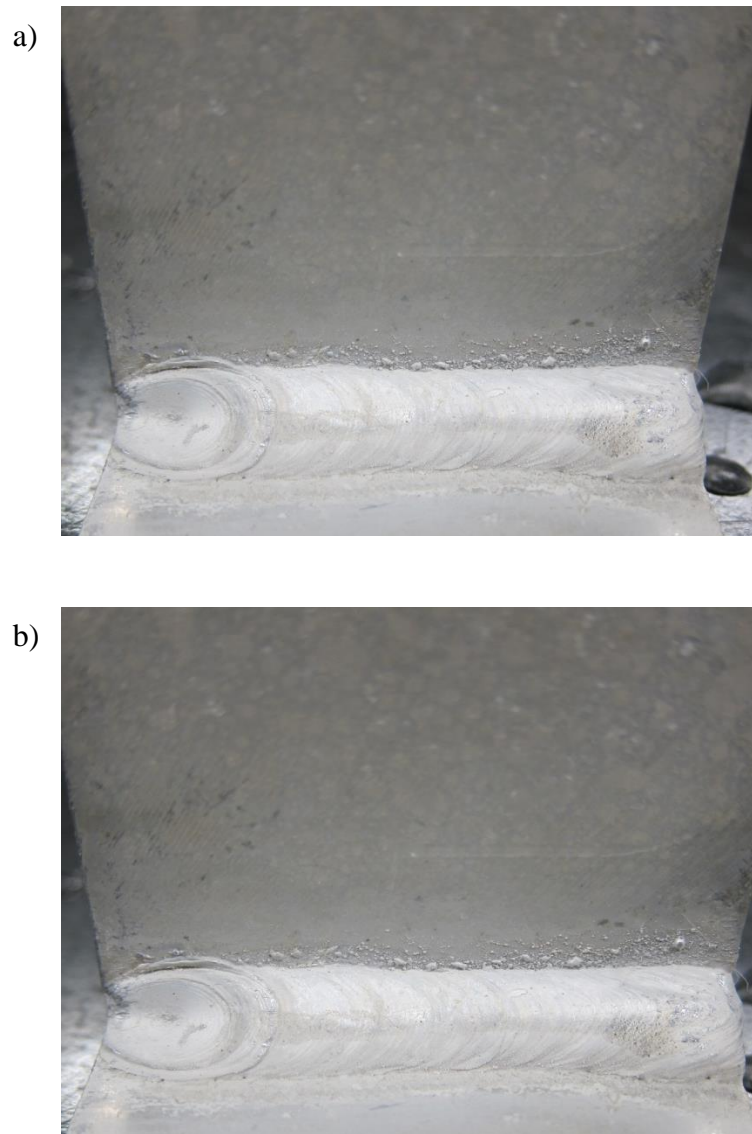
Close-up images of T-joint welded configuration H (ER5356/AA7003/≡) in the (a) as-welded T6 condition and (b) as-welded T6+PB condition post exposure to GMW-14872.
